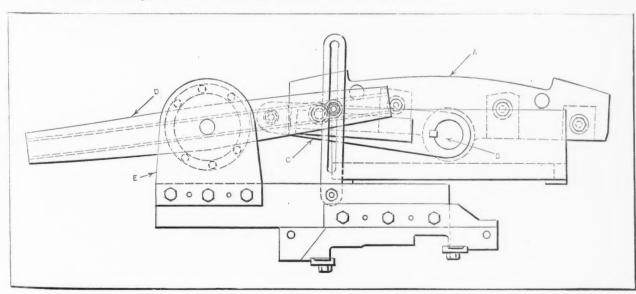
Details of Construction of the Special Radius-link Milling Fixture
